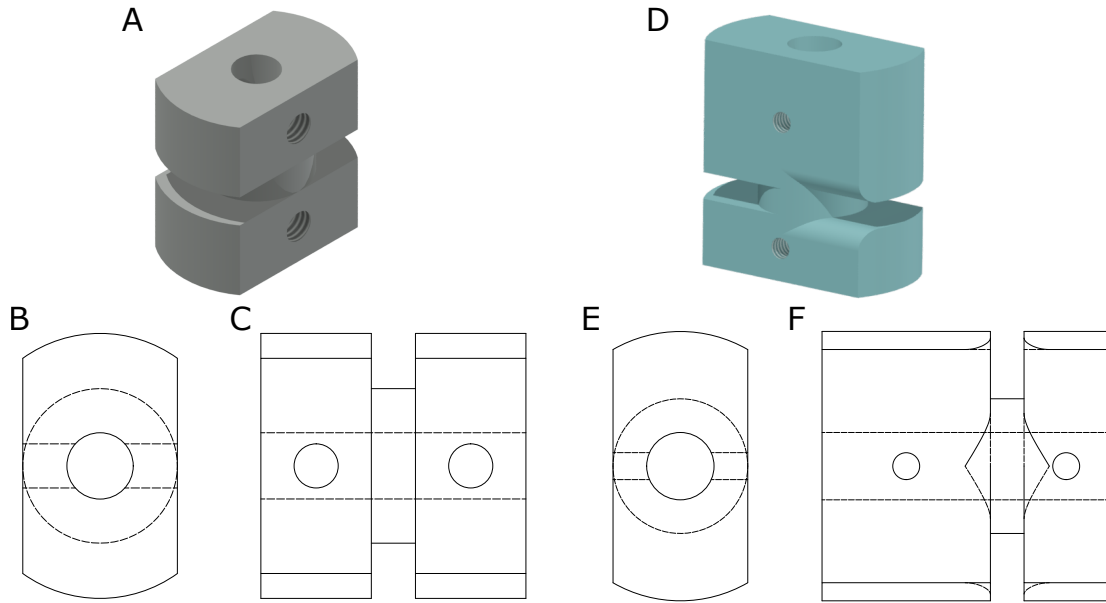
(A) 3D CAD of version one of the locking part for the custom fibre connector; (B) and (C) Technical drawings of version one; (D) 3D CAD of version 2 of the locking part; (E) and (F) Technical drawings of version two.
